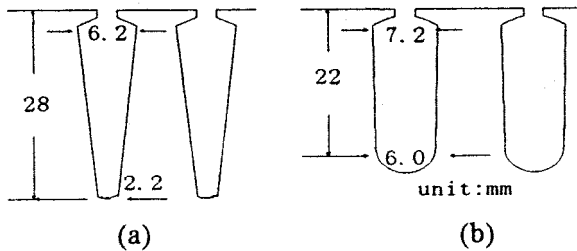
Shapes of rotor slots of (a) Motor 1 and (b) Motor 2.
